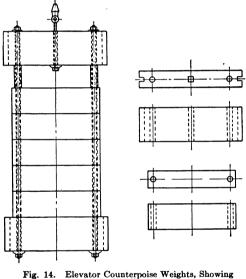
Elevator Counterpoise Weights, Showing Method of Fastening
